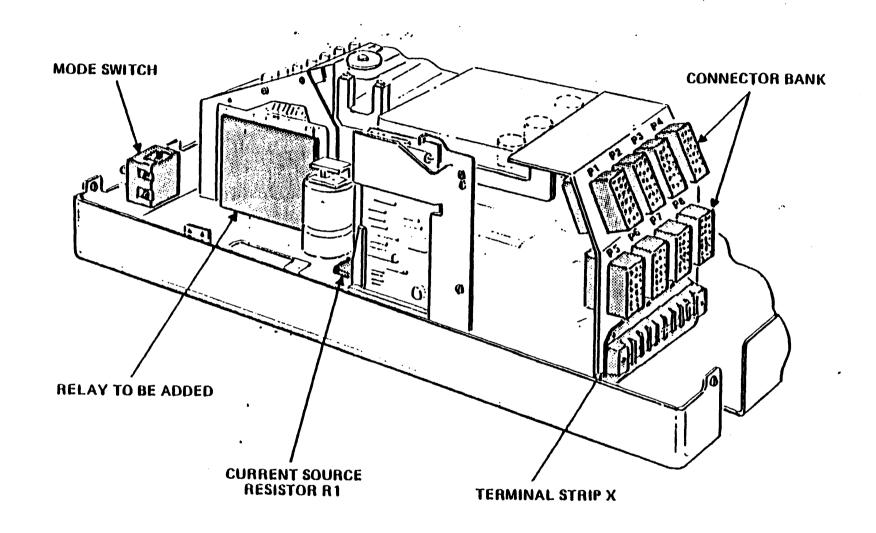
SIDE VIEW- TTY with Housing Removed
